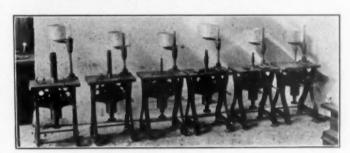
MACHINES AFTER CORES HAVE BEEN FORMED.
